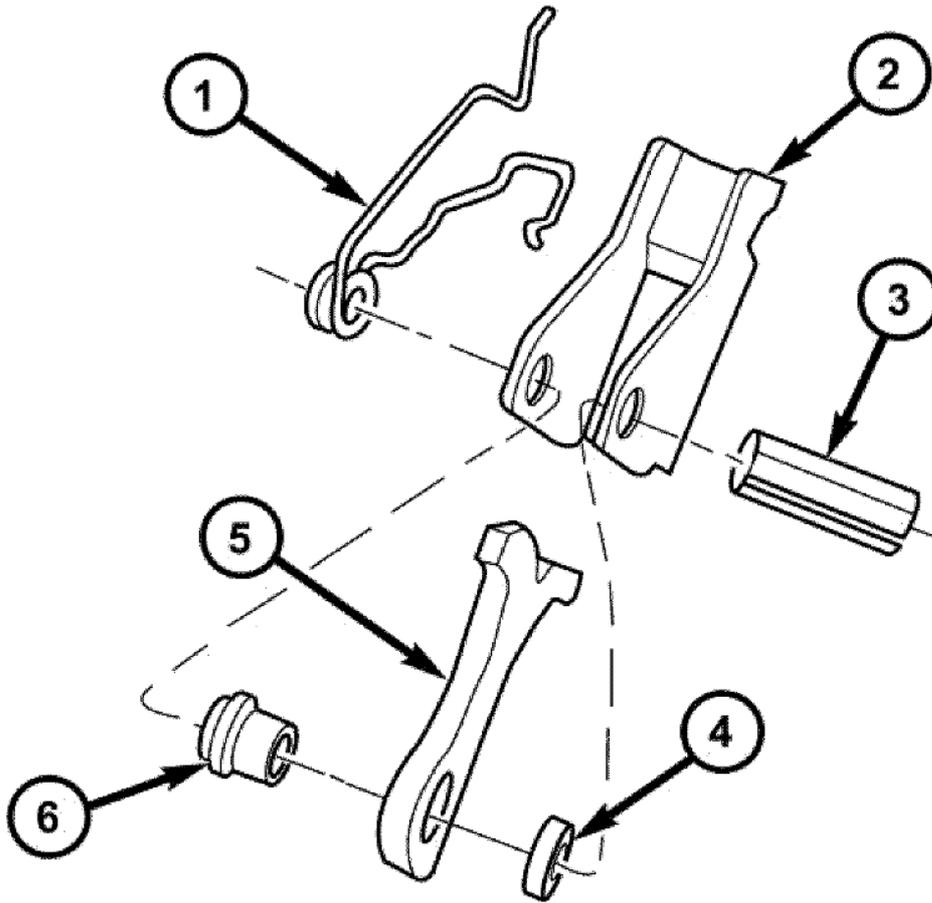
Removing/Installing Pivot Shaft & Guide Bracket Assembly
